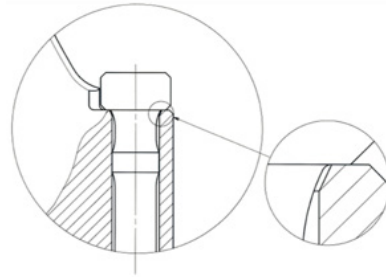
Proper seat of the bolt on the contact surface under the bolt head.
